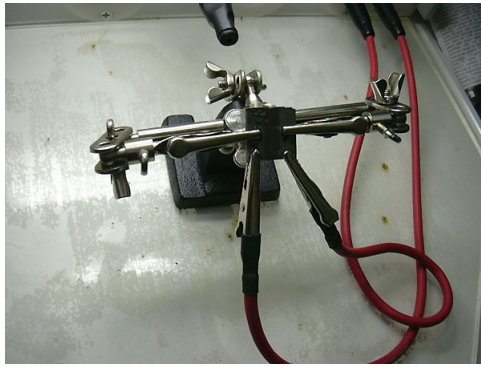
Welding equipments: microimpulse Welder.
